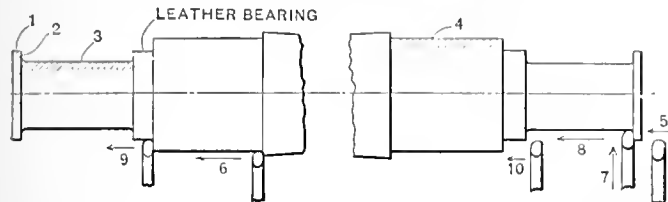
Cuts taken with Axle Reversed in Lathe.
